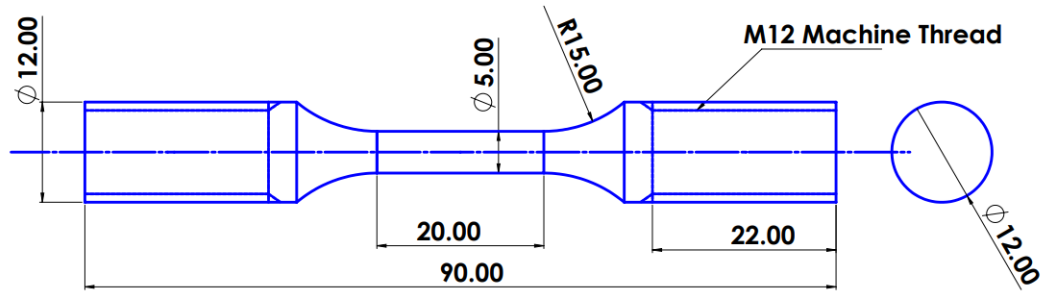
Schematic showing the dimensions of the high cycle fatigue test specimen
